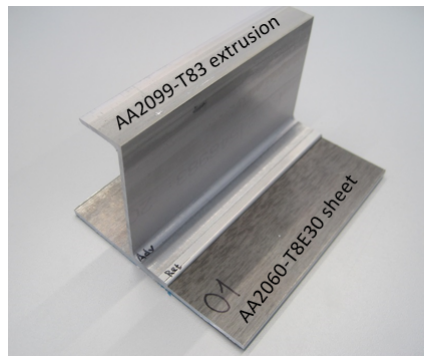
Friction stir welded sample of Z-shaped extrusion of AA2099 T83 and cold rolled sheet of AA2060 T8E30 alloys.
